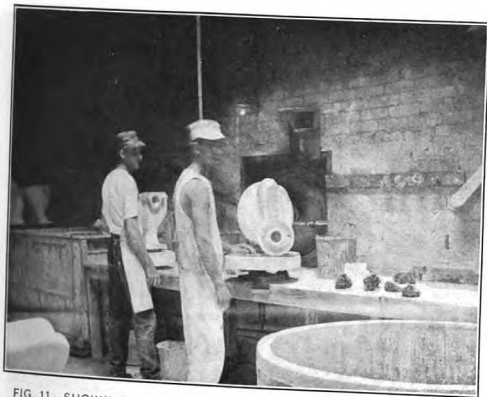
SHOWING METHOD OF REMOVING HEAVY GLAZE FROM WARE. SPONGES ARE OFTEN USED AND AFTER GLAZE BECOMES HARD A STEEL TOOL IS USED. NOTE PEDESTAL FOR REVOLVING THE WARE AND EXHAUST FAN IN WALL FOR REMOVING DUST.
